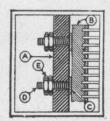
by a broad hexagonal-headed brass bushing locked to end-plate (D) by lock nut (E). A steel spacer (F) rests against the hexagonal bushing (E) and thus two dissimilar metals afford a fine bearing which is not subject to wear or play.
